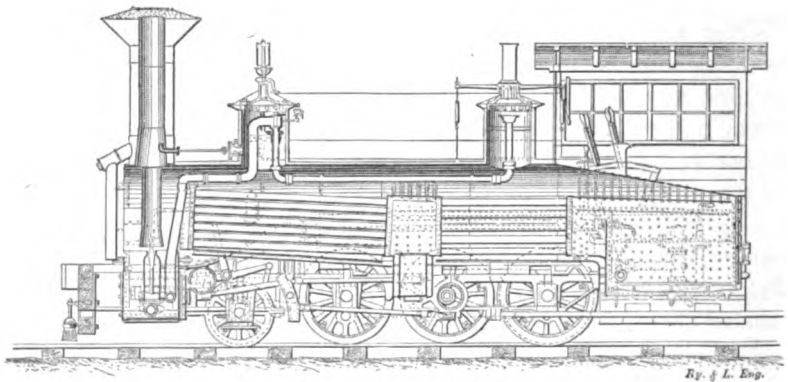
Millholland's 6-Wheel Connected Engine, with His Patented Boiler (Pawnee Class)
